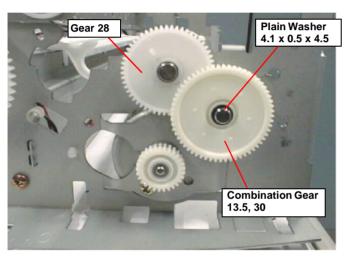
Removing the Flat Washer & Gear 13.5,30
